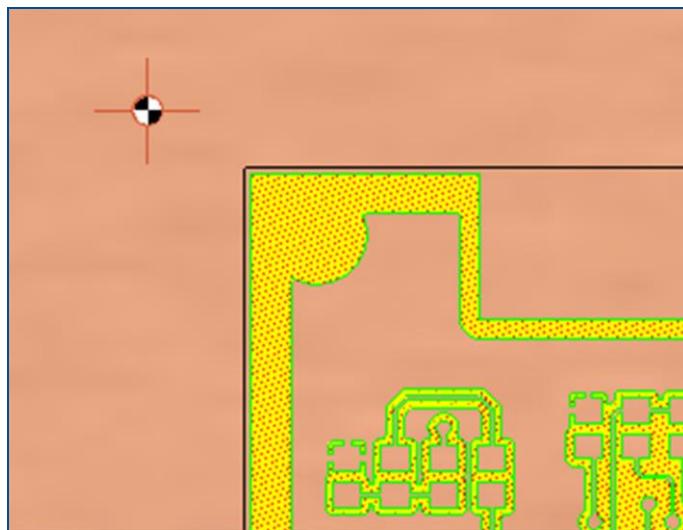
Matching laser head and fiducial position in the *Processing* view
